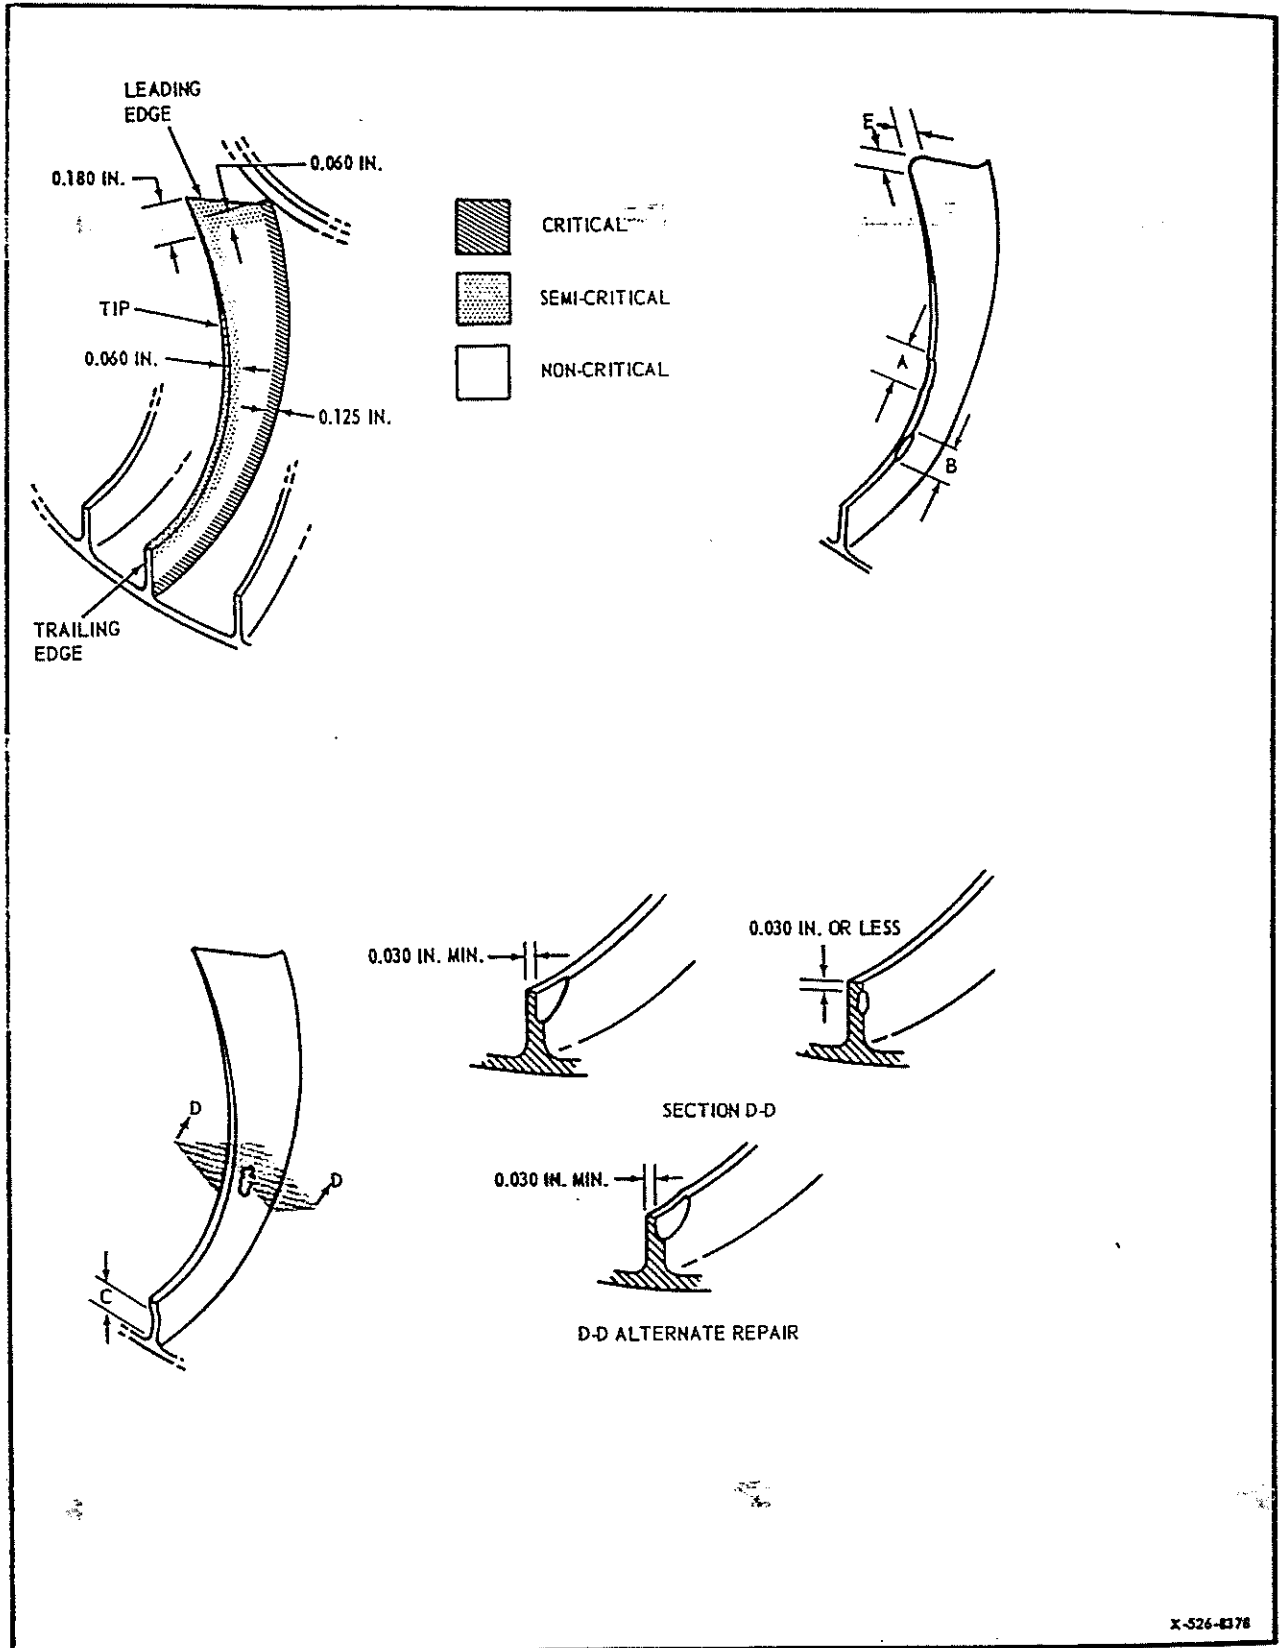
Centrifugal Compressor Impeller Blade Repair
